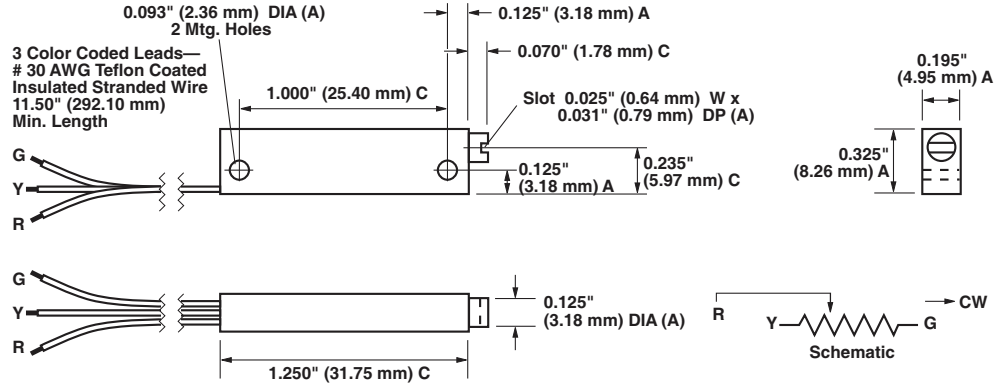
SCHEMATIC AND DIMENSIONS FOR PIN STYLES in Inches (Millimeters)
